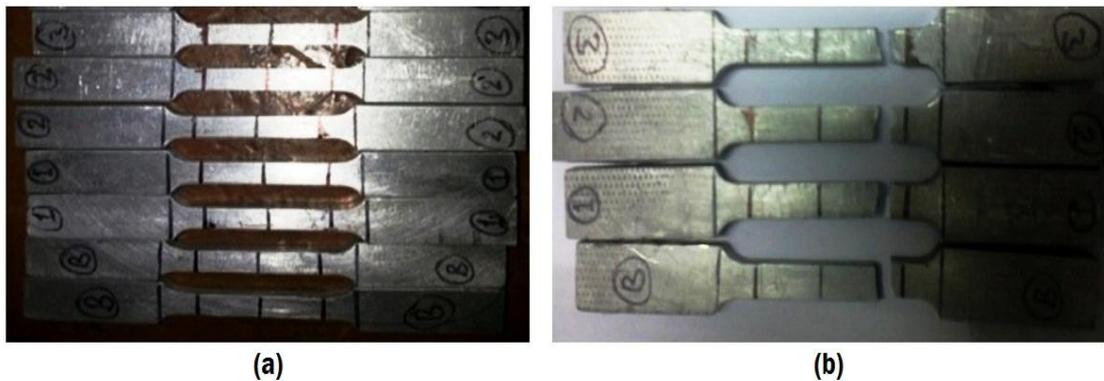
Tensile samples of FSPed cast Al-17wt% Si alloy at 664 rpm tool rotation speed and 26, 40, 60 mm/min tool transverse speed.
